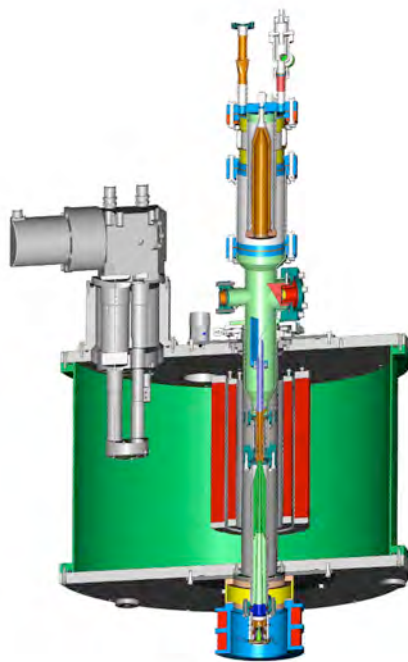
Layout of the designed gyrotron mounted inside the 9.7T He-free superconducting magnet.
